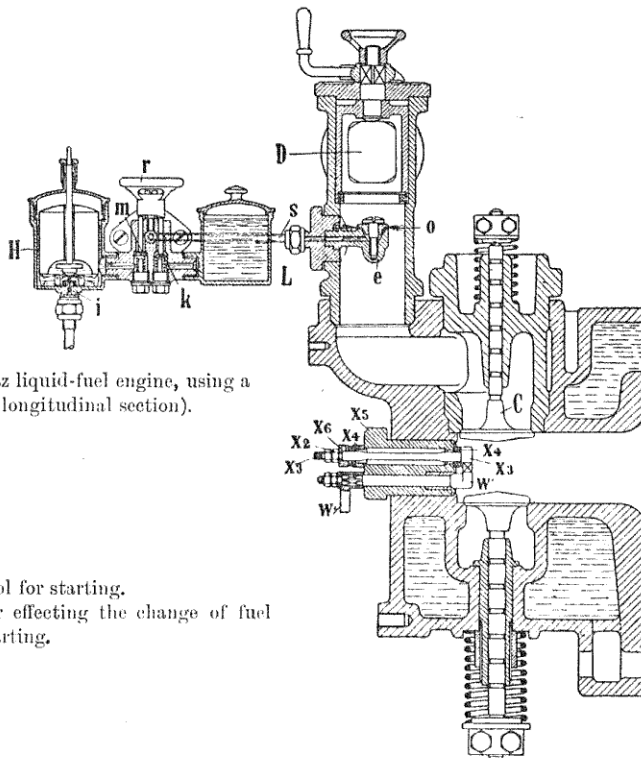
Deutz liquid-fuel engine, using a vaporiser (longitudinal section).
